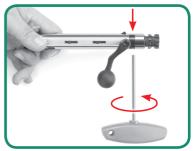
< TITAN 16® > straight pull, assembly bolt knob
